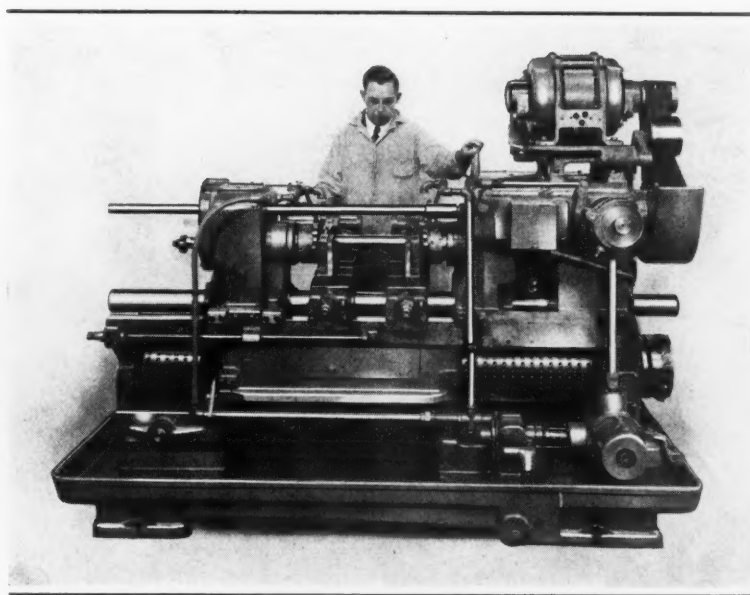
Rear View, Showing Cam Drums, Lead-screw for Right-hand Milling Head, and Fast-motion Drive
